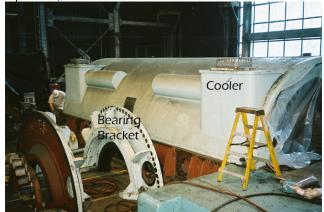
shows bearing bracket and cooler. The generator frame holds the coolers and supports the bearing brackets that support the bearing, journals, and rotor.
